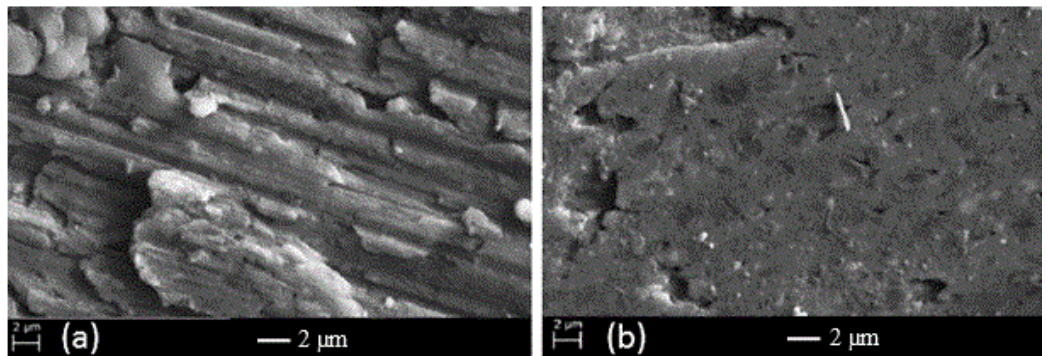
The surface finish boron carbide particle-reinforced aluminium MMC at (a) lower feed rate (0.1 mm/rev) and (b) higher feed rate (0.3 mm/rev).
